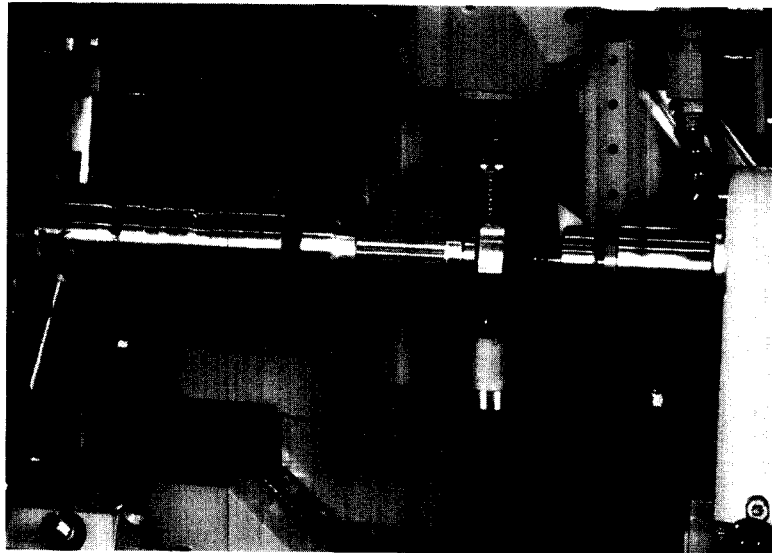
Hobbing spur gear teeth. (Courtesy of Bourn & Koch.)
